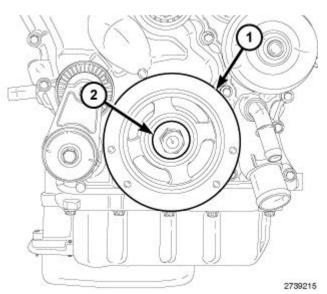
Crankshaft Vibration Damper & Bolt Courtesy of CHRYSLER GROUP, LLC
